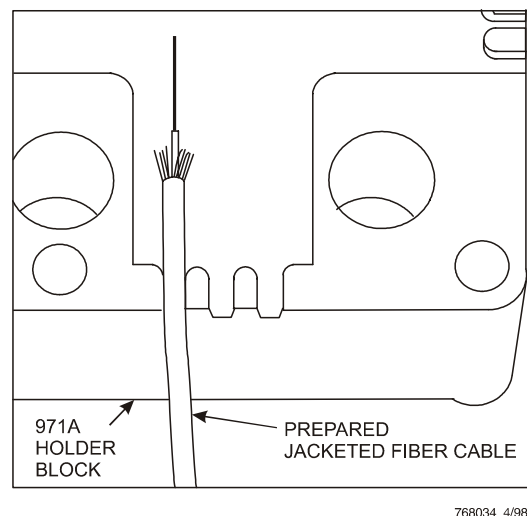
971A Holder Block with Jacketed Fiber Cable
